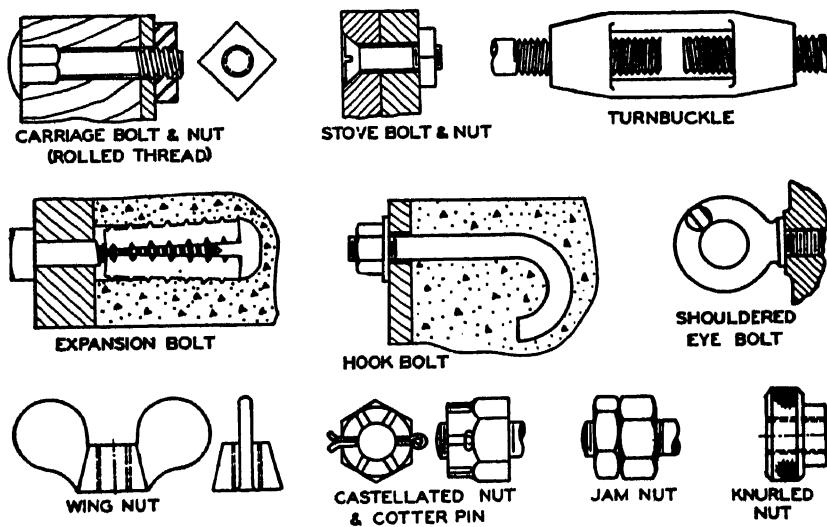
Bolts, Nuts, and Other Fasteners.
